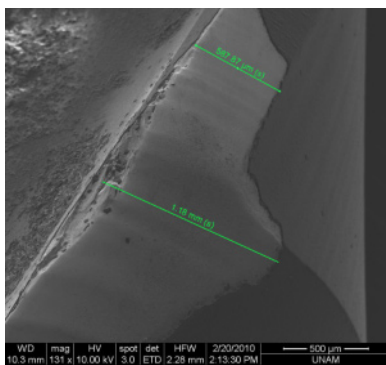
Detailed view of the fracture zone of the cutting tool used in Experiment #4
